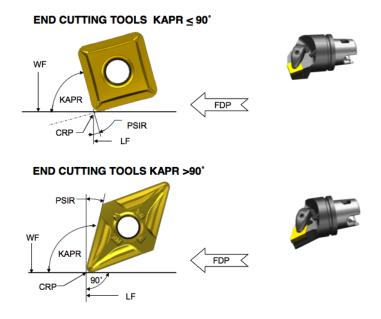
Cutting Tool Measurement Diagram 2 (Cutting Tool, Cutting Item, and Assembly Item – ISO 13399)
